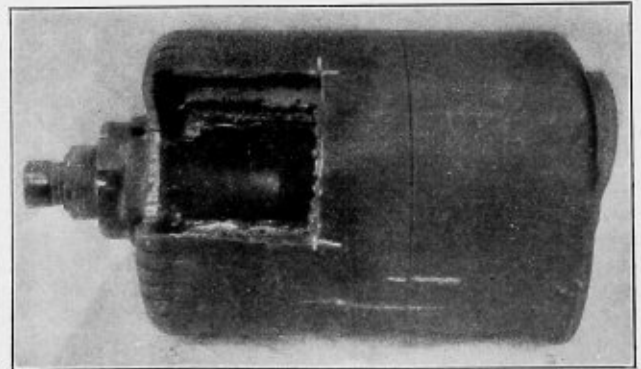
SAFETY VALVE CASING, SHOWING ABSENCE OF LOCK NUT AND BENT SCREW
